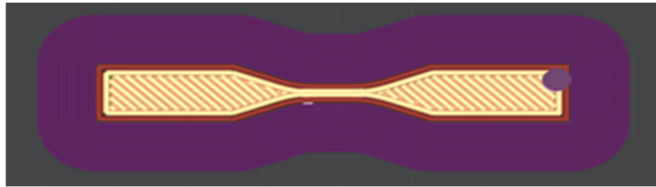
Tensile test specimen printing scheme for 3D printing.
